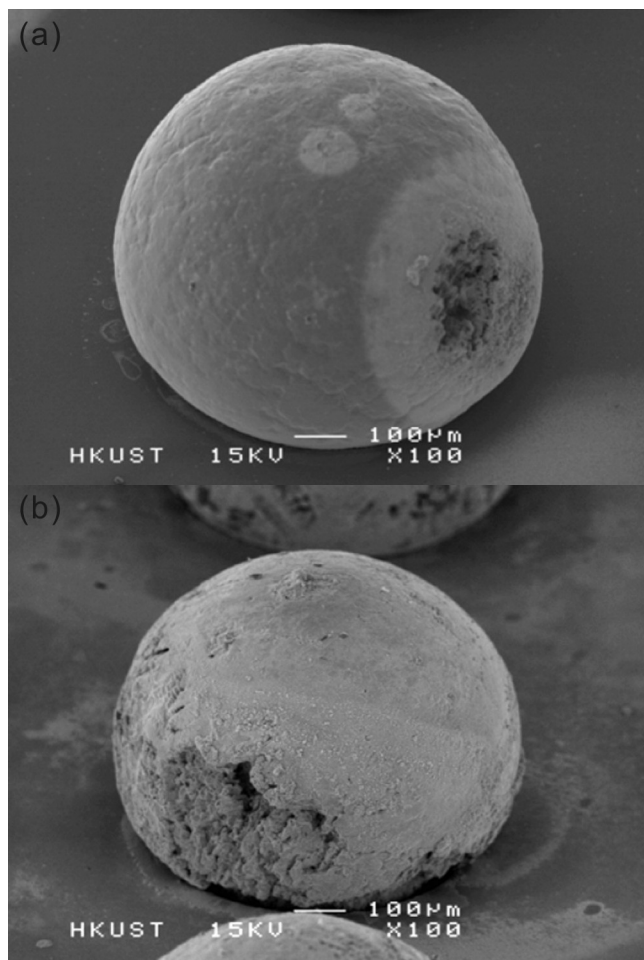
Surface morphology changes of solder balls after the salt spray test for 96 hrs: (a) Sn-Pb solder, and (b) SAC solder[39].
